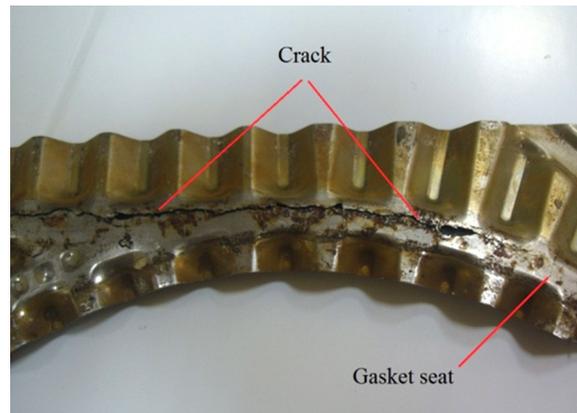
Appearance of a crack on the gasket seat of heat exchanger plates.
